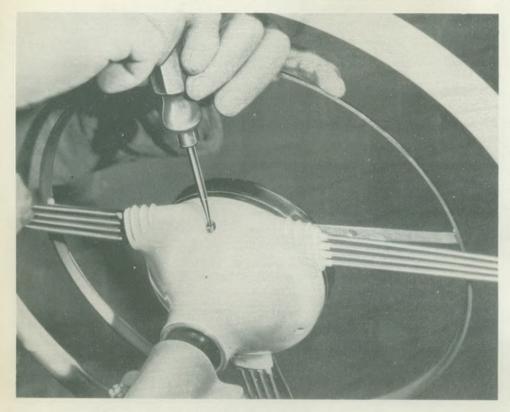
Removal of one of the three grub-screws which secure trafficator ring in steering wheel hub
